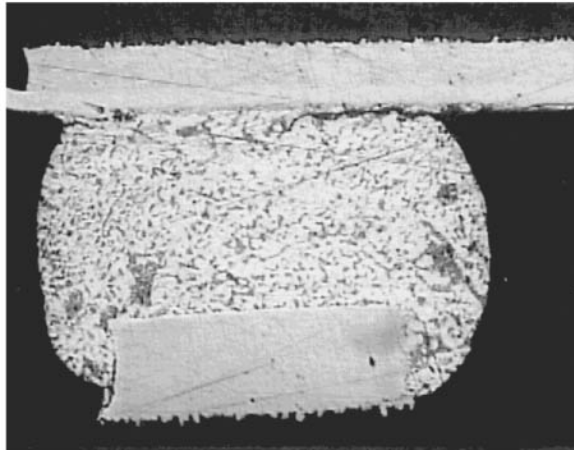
X-section of 0.5 mm pitch package after thermal fatigue failure. Notice the crack propagation at the package-to-solder interface.
